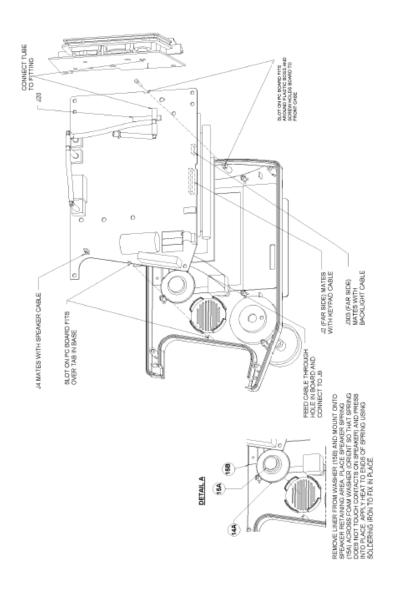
A1 Front Case Assembly Drawing (2 of 3)
